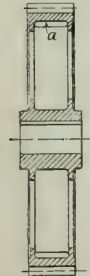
SPUR WHEEL CONSTRUCTION.
